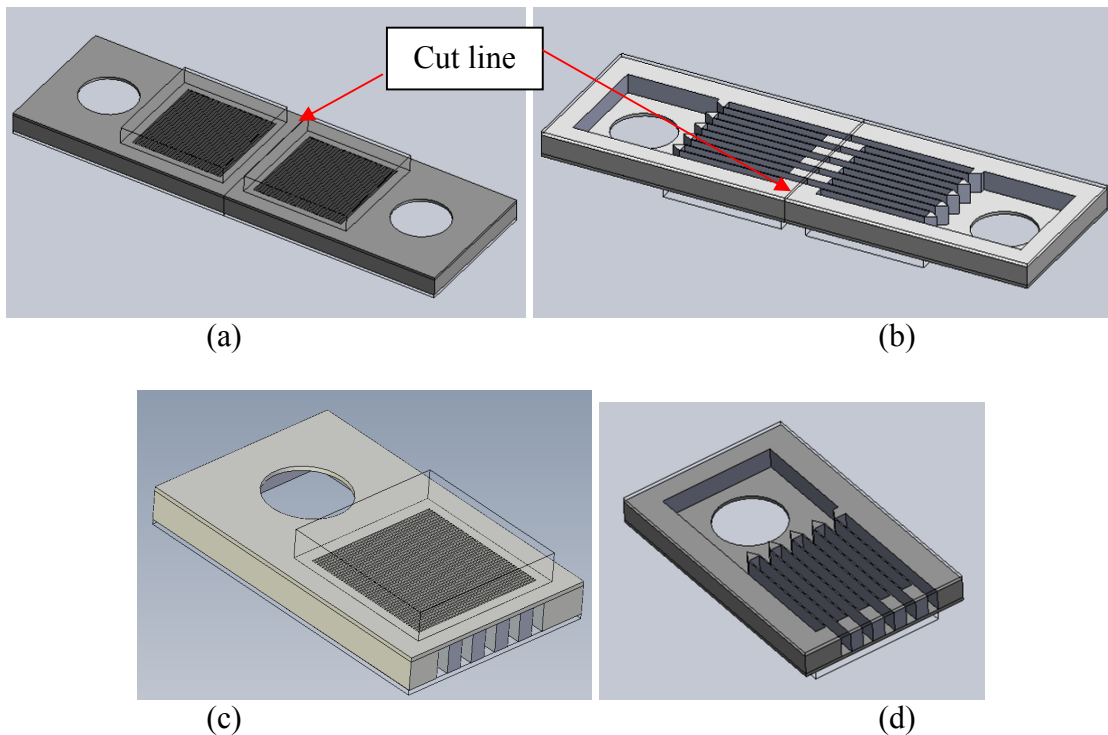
Schematic depicting the multichip capability (a) view from the top (b) backside view with the cut line shown (c) single device top side (d) single device backside
